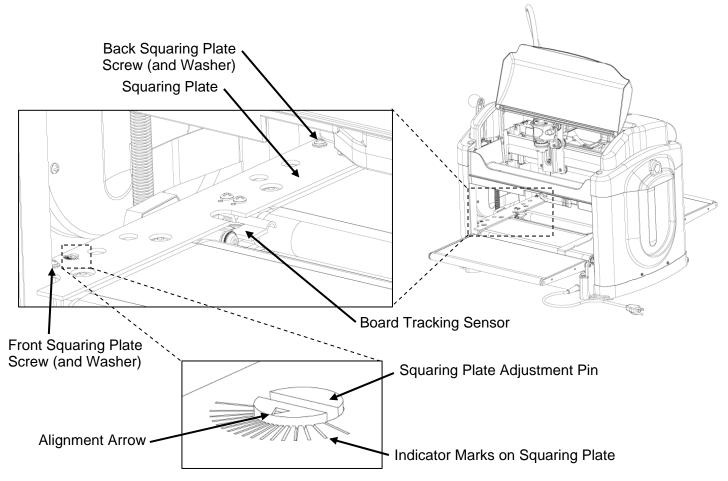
DETAILED VIEW OF THE SQUARING PLATE ADJUSTMENT
